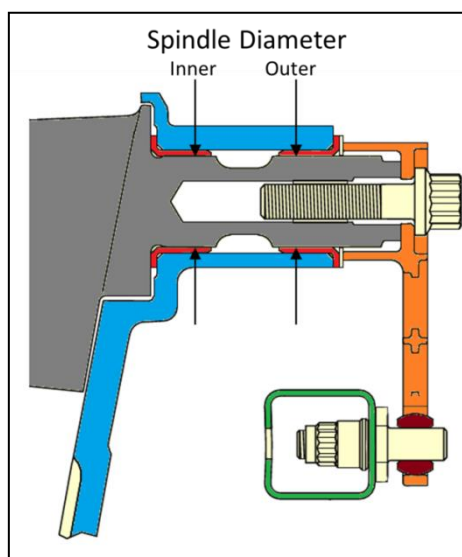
Vane Spindle Diameter (*Engine Manufacturer*)
